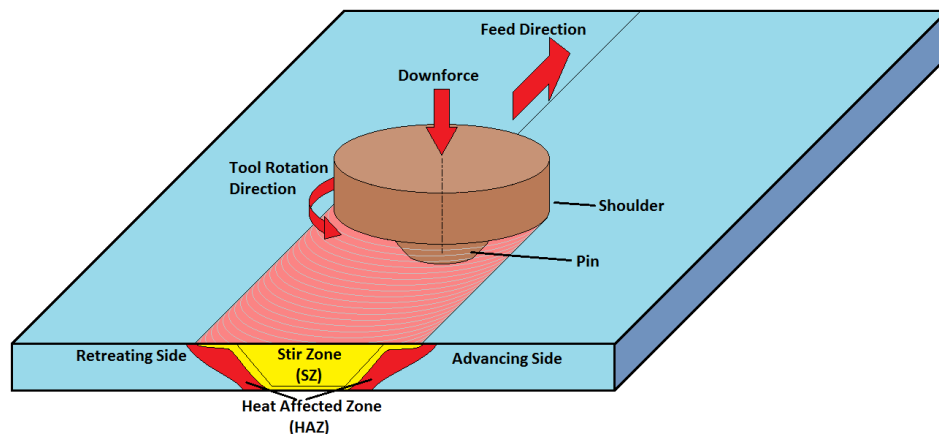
A schematic illustration of the friction stir welding process.
